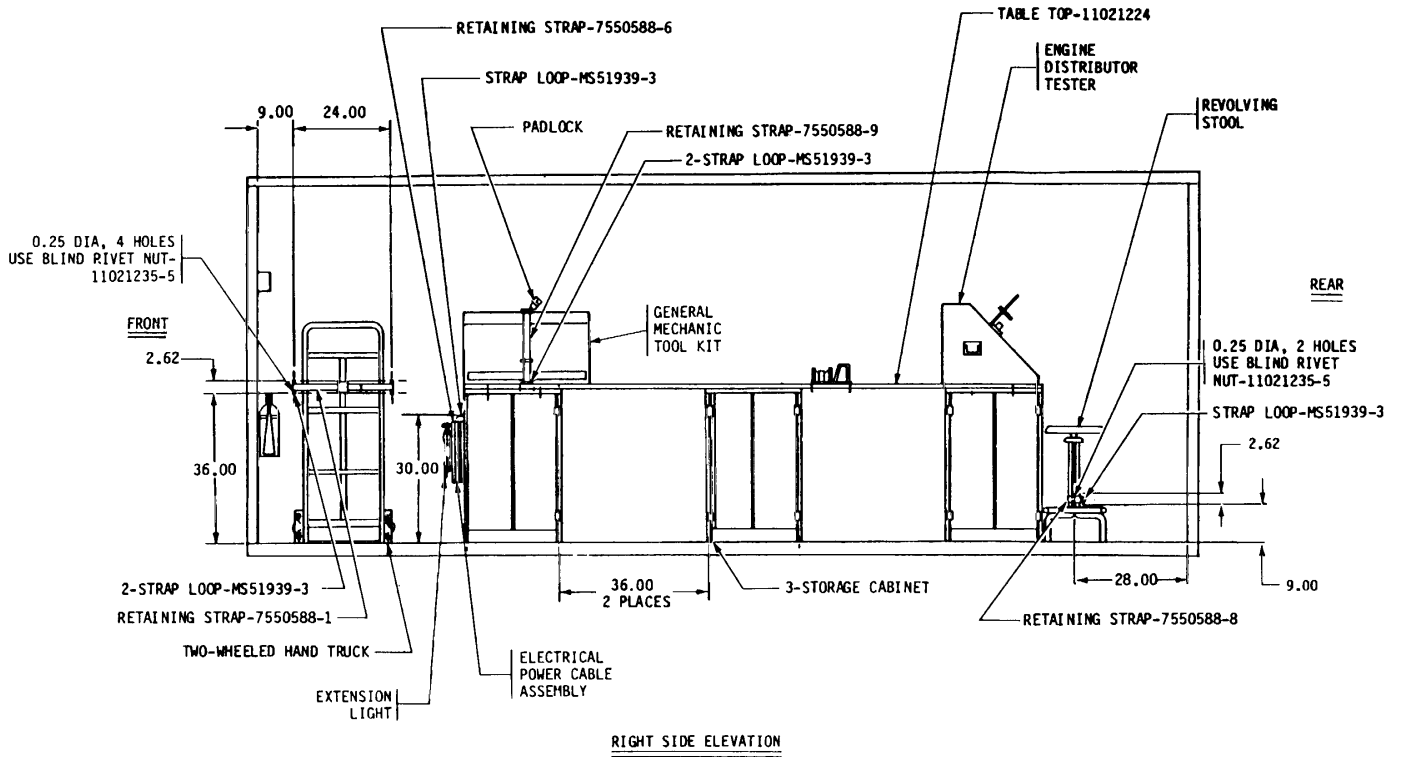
Components to be Mounted, unit 2, ISO-2-1, Right Side Elevation.
